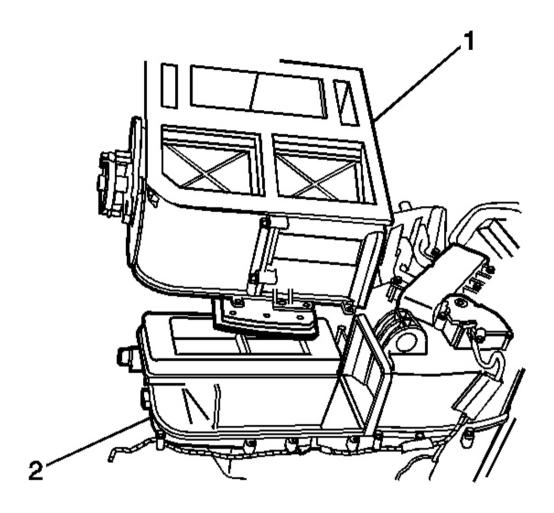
Air Distribution Housing And HVAC Module Assembly Courtesy of GENERAL MOTORS CORP.
